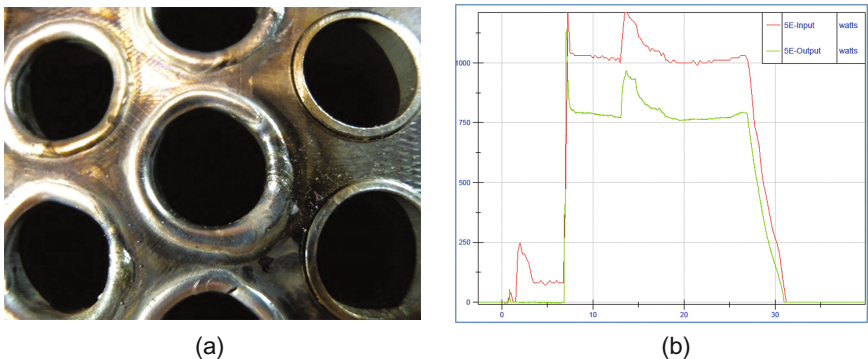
(a) Picture of a pool weld of a 316 L test structure representing the heat exchanger component found in a Nuclear reactor construction, (b) Power demanded by welding machine (in red) vs power delivered to weld (in green) $\eta = 75\%$.
